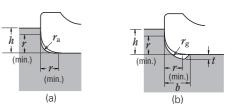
2 Chamfer Dimensions, Fillet Radius, and Shoulder Height
